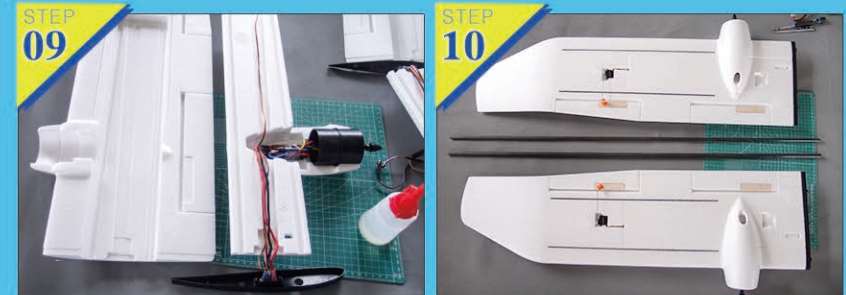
Adhere wing's retaining plate to wing. At last, install carbon-fiber bracing sheet, servo
